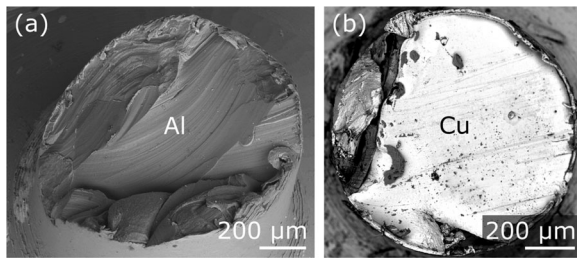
BSE-SEM images of the fracture surfaces from two Al–Cu tensile test specimens that fractured before testing. (a) shows the Al side of one fracture surface imaged slightly from the side, while (b) shows the Cu side of another fracture surface viewed from the top.
